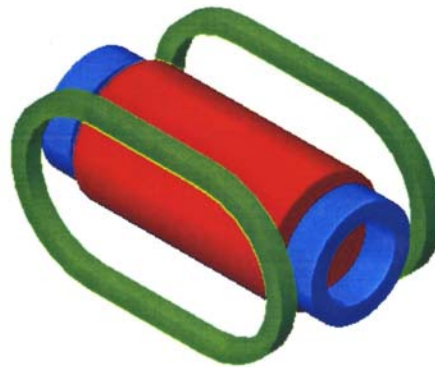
An exploded view of the superconducting magnet assembly containing solenoid, bucking coils and racetrack coils.
